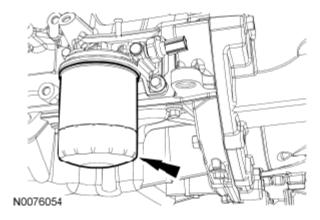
Locating Engine Oil Filter Courtesy of FORD MOTOR CO.
